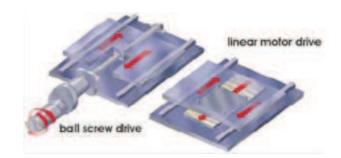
Scheme of driven by "ball screw-servo motor" and linear motor
